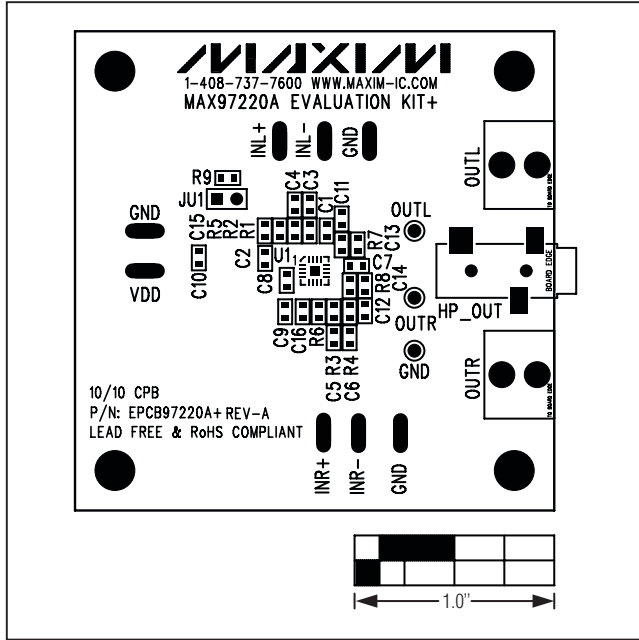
MAX97220A EV Kit Component Placement Guide—Component Side
